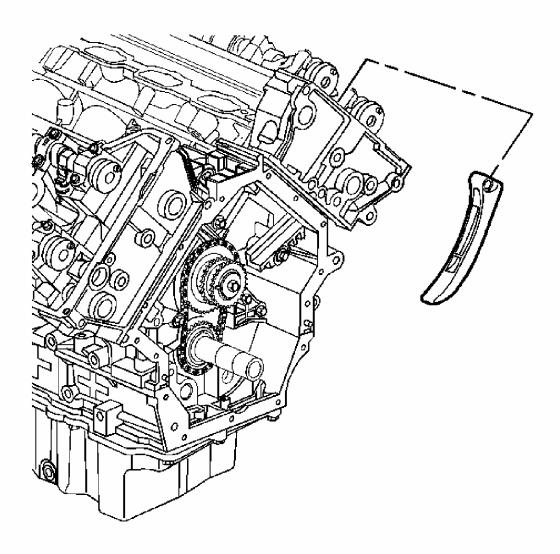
View of Left Secondary Camshaft Drive Chain Shoe Courtesy of GENERAL MOTORS CORP.
